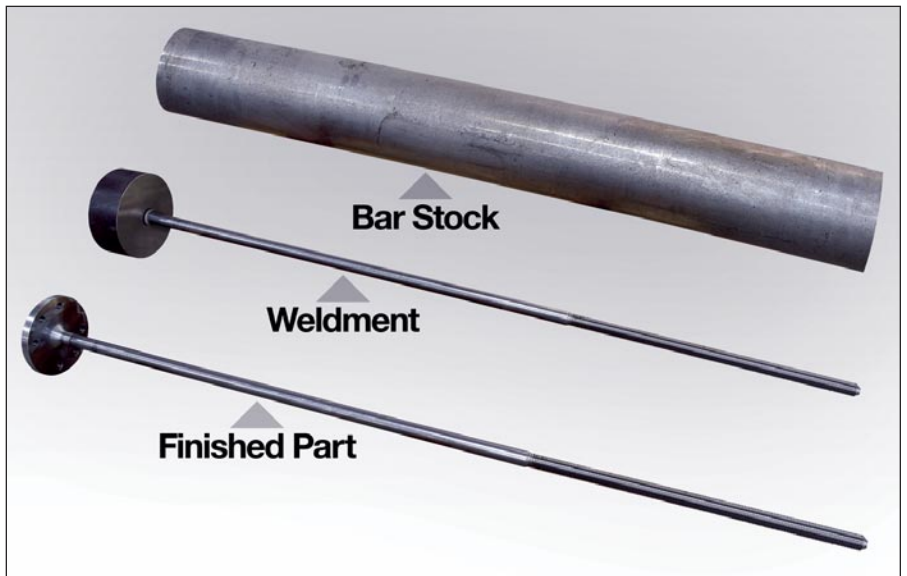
Friction welding can join pre-machined components into a net, or near-net, shape. Shown in the center of this photo is a pre-threaded shaft that was friction welded to a disk.
